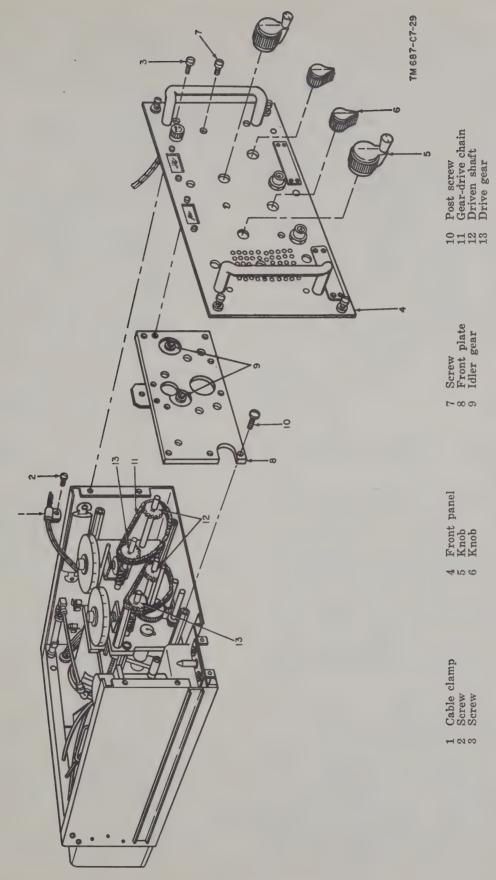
(Added) Transmitter F-band RF tuner, disassembly.
